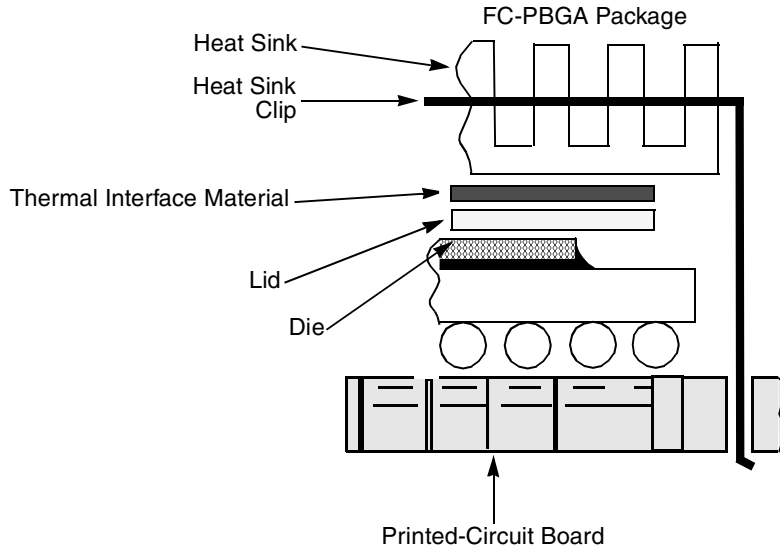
Package Exploded Cross-Sectional View with Several Heat Sink Options
